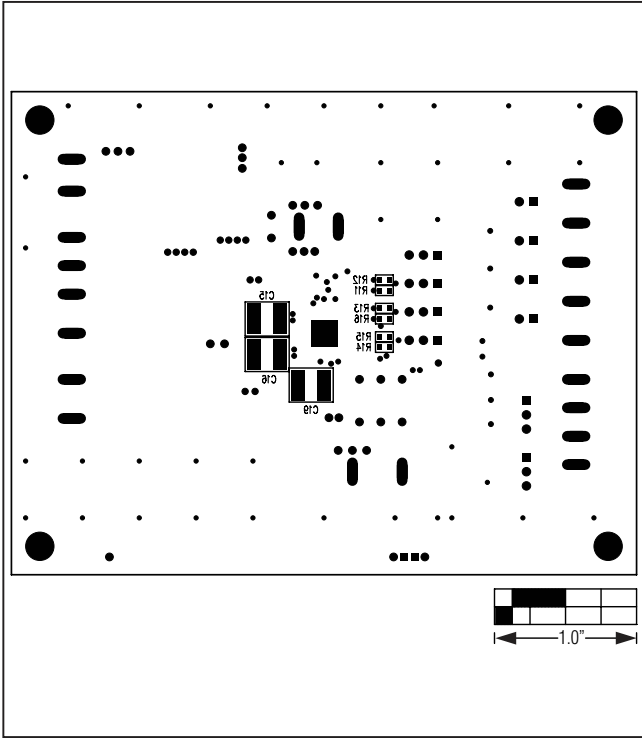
MAX16920B EV Kit Component Placement Guide—Solder Side
